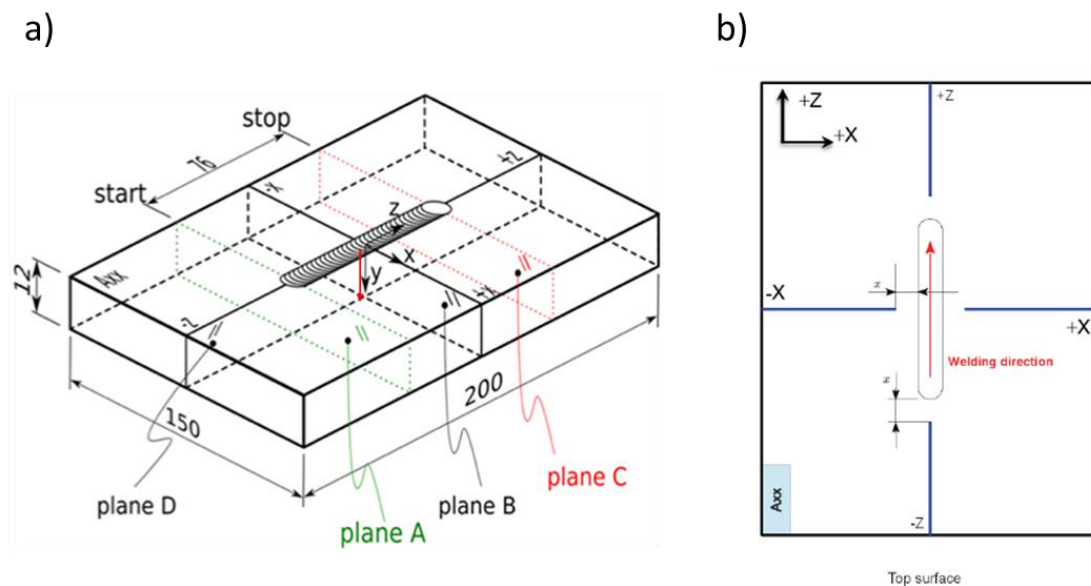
a) TG6 schematic showing relevant planes and lines relative to manufacturing inputs. b) top view of component showing welding direction and coordinate system.
